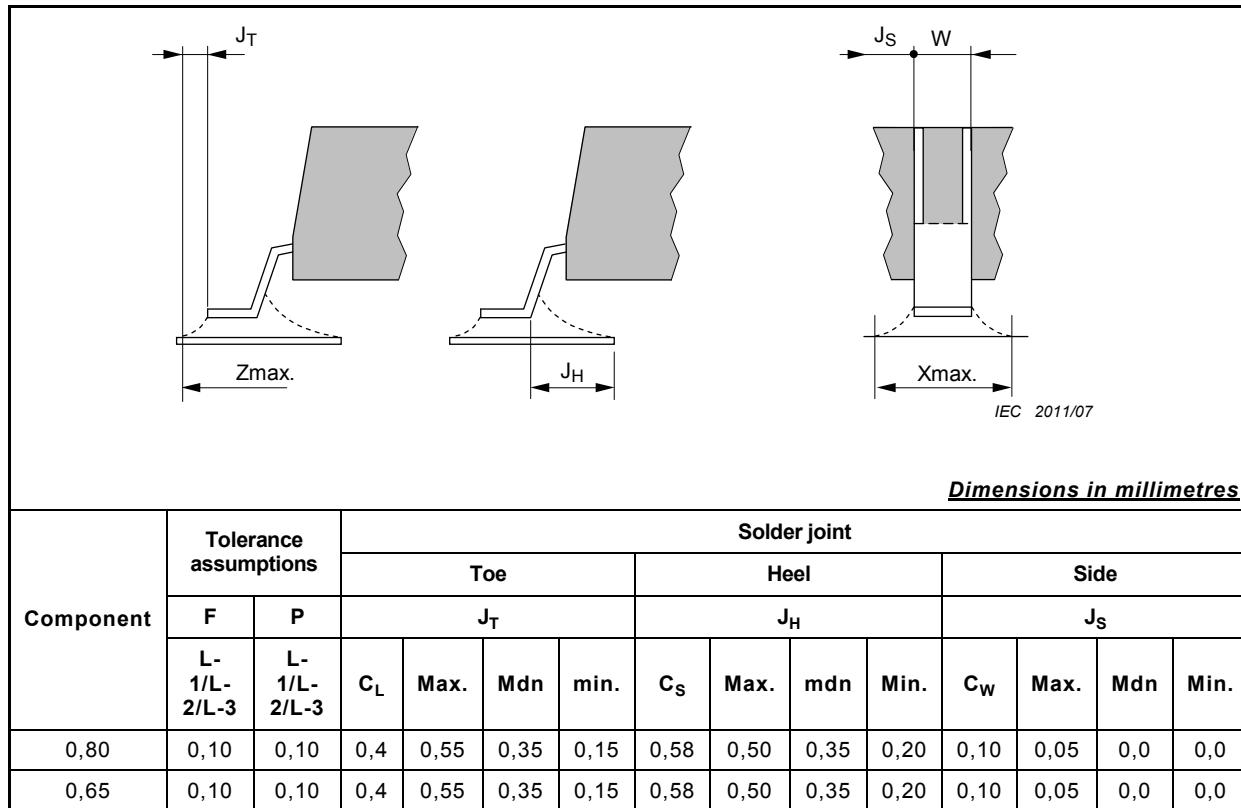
Solder joint fillet design (see IEC 61188-5-1, Table 2)
